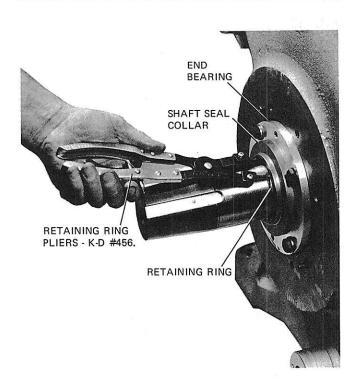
REMOVING CRANKSHAFT RETAINING RING
